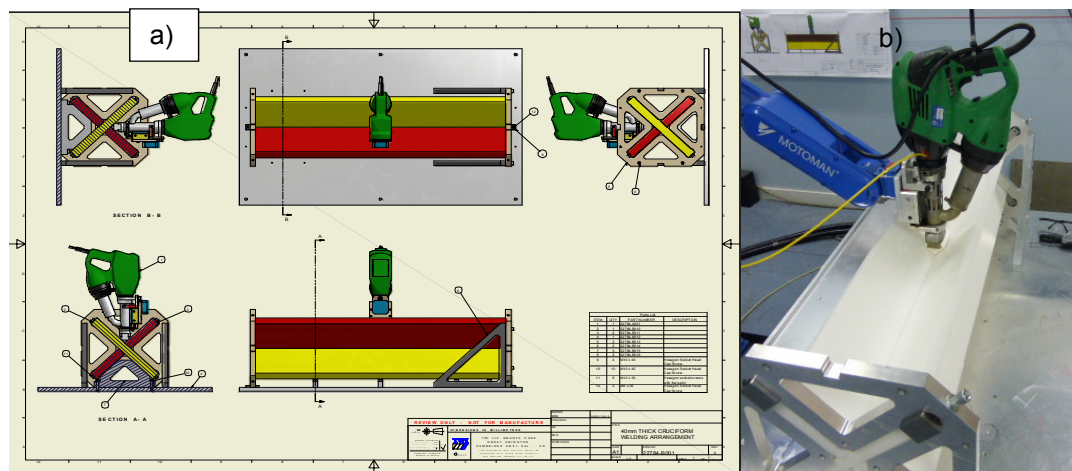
Aluminium tooling for the T-joints and cruciform joints: a) design drawing, b) photograph of the final assembly.
